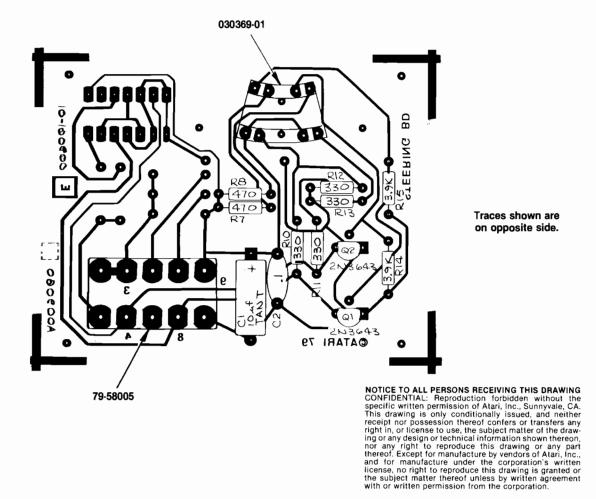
Steering Printed Circuit Board Assembly A009060-02 C
